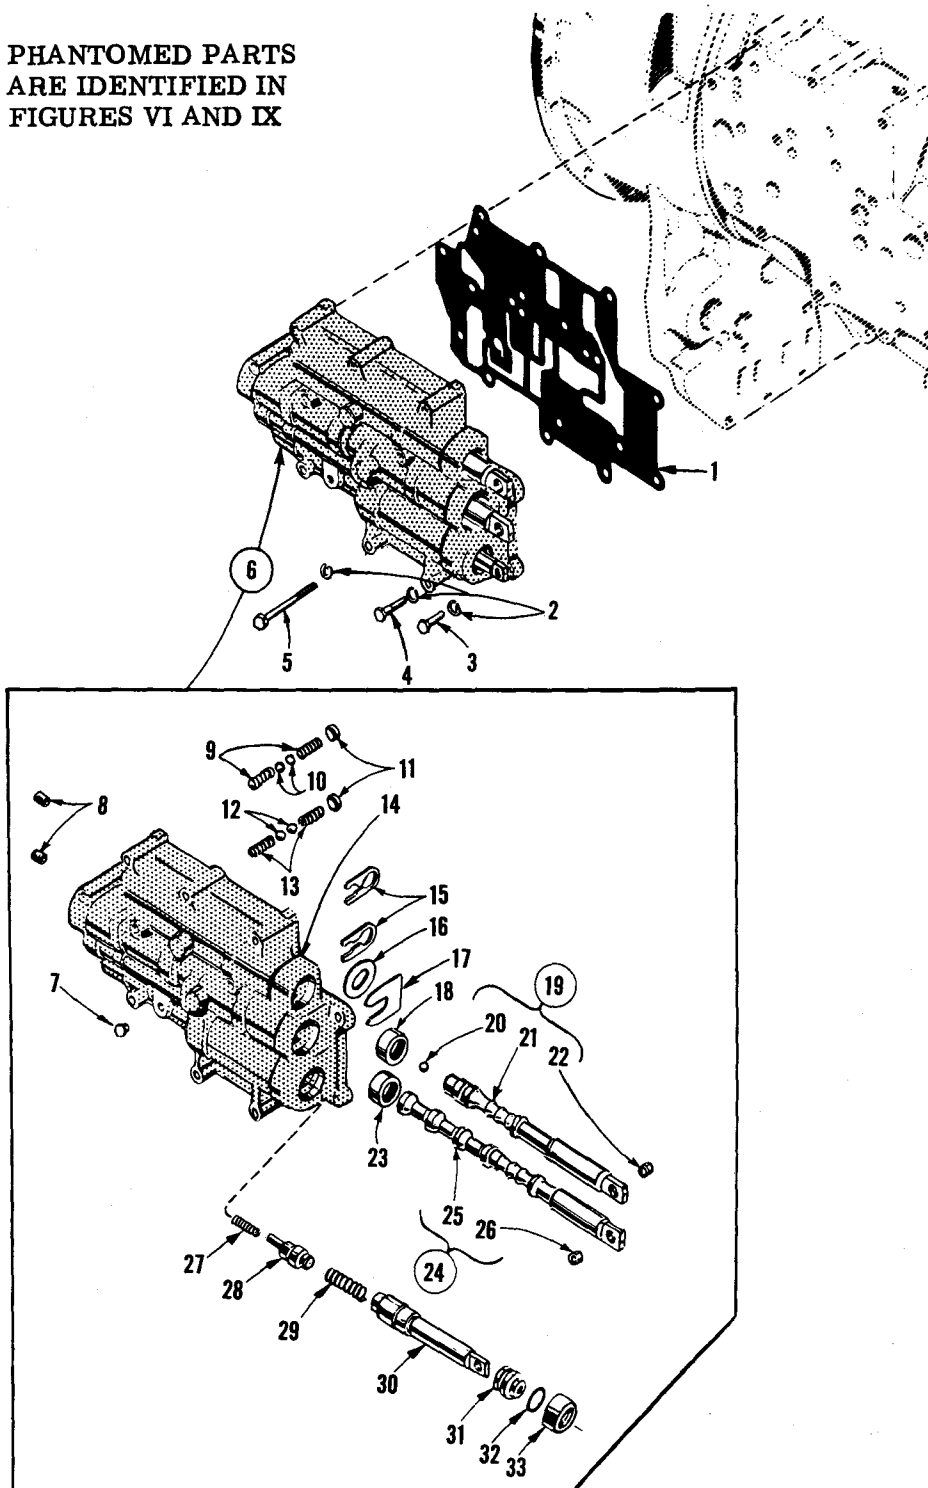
CONTROL VALVE BODY, EXPLODED VIEW
